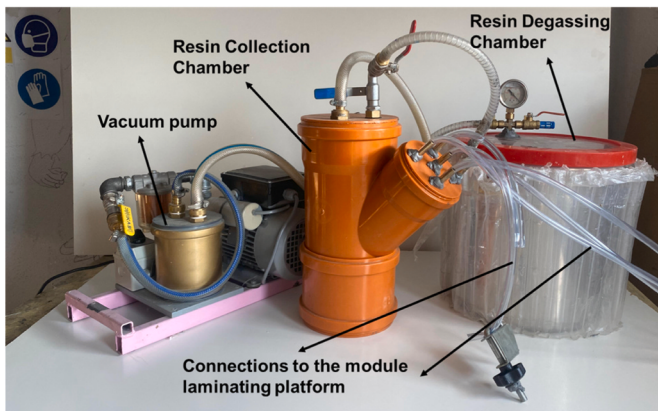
Vacuum system comprising the vacuum pump, the resin collection chamber and the resin degassing chamber.
